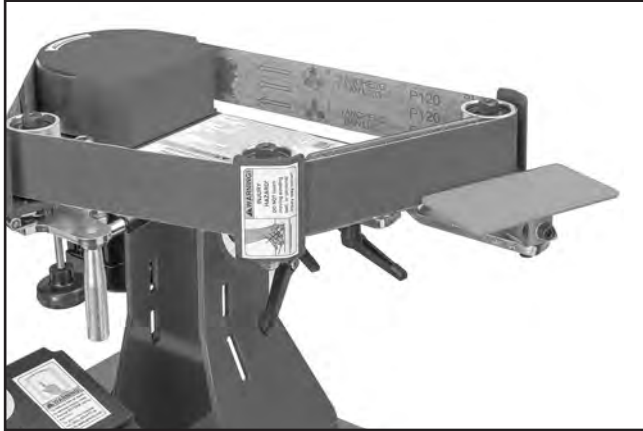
Example of tool rest swivel adjusted to match platen tilt.
